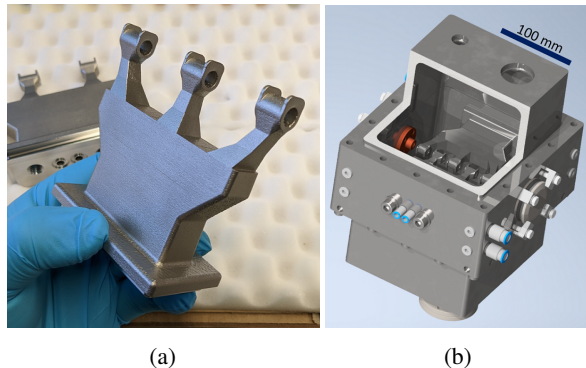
Overview of the cavity geometry and printed parts. (a) First 3D printed girder drift tube structure. (b) Cross section of the assembled cavity model.
